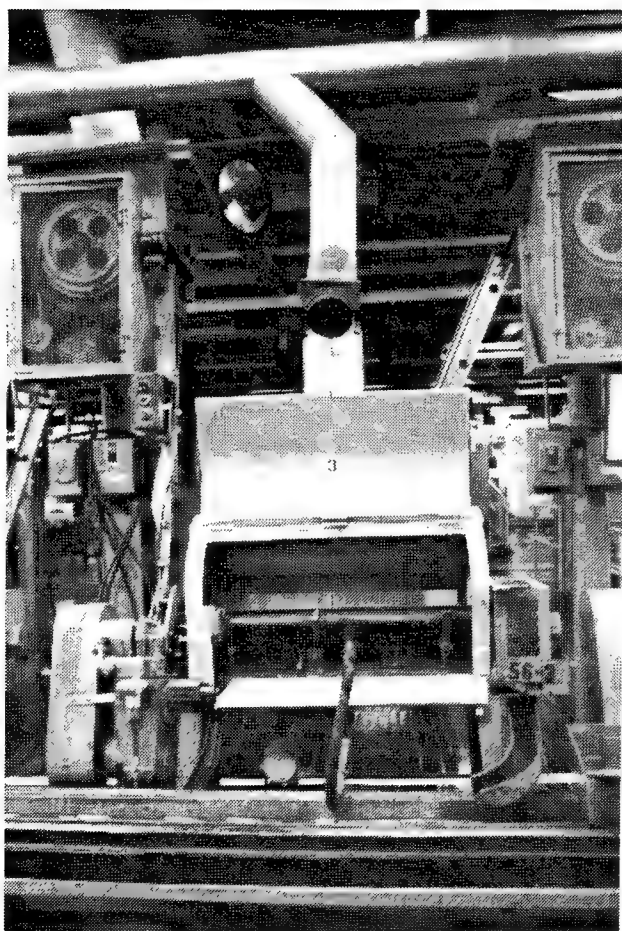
Building 3: Mouth and Neck Anneal Machine manufactured by Cannister Co.
